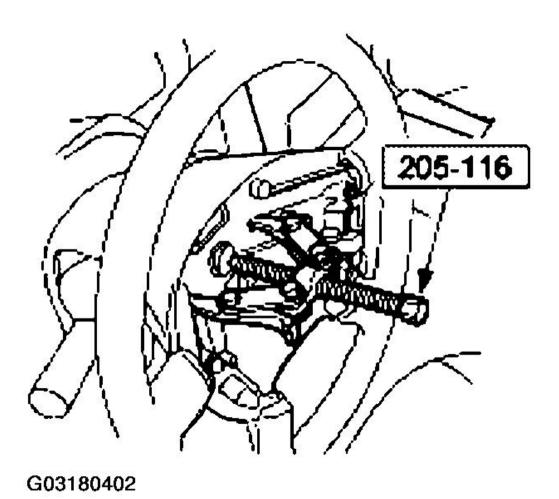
Removing Steering Wheel Courtesy of FORD MOTOR CO.
